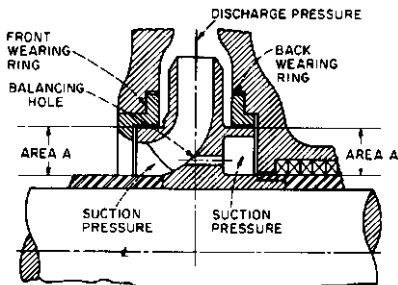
Balancing the axial thrust of a single-suction impeller by means of wearing rings on the back side and balancing holes
